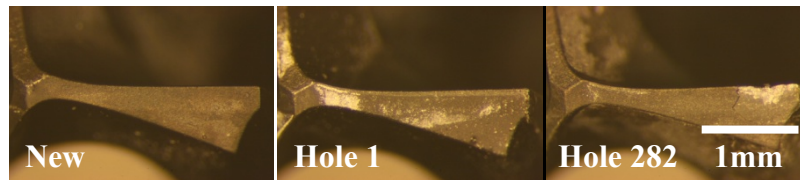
Tool wear micrographs of CVD diamond coated drill under 3bar cutting fluid, 260m/min cutting speed (Test 4)
